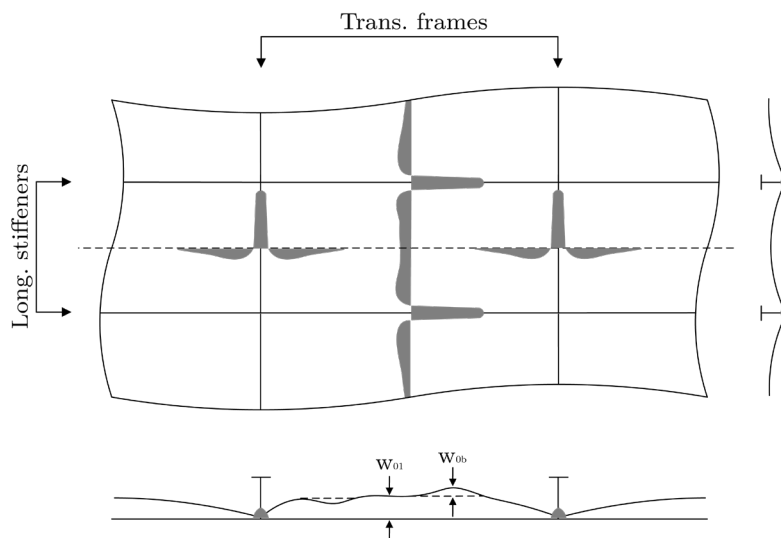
Schematic illustration of initial imperfection caused by welding reproduced from [52]
